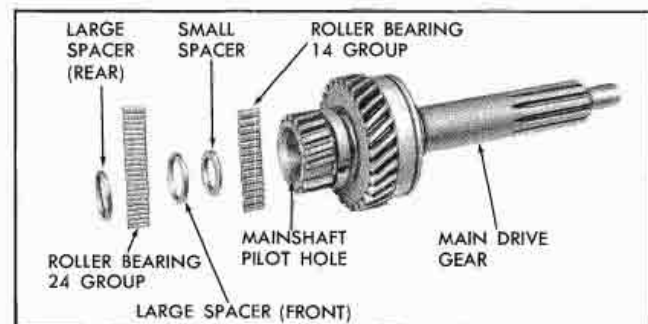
Main Drive (Clutch) Gear Assembly
